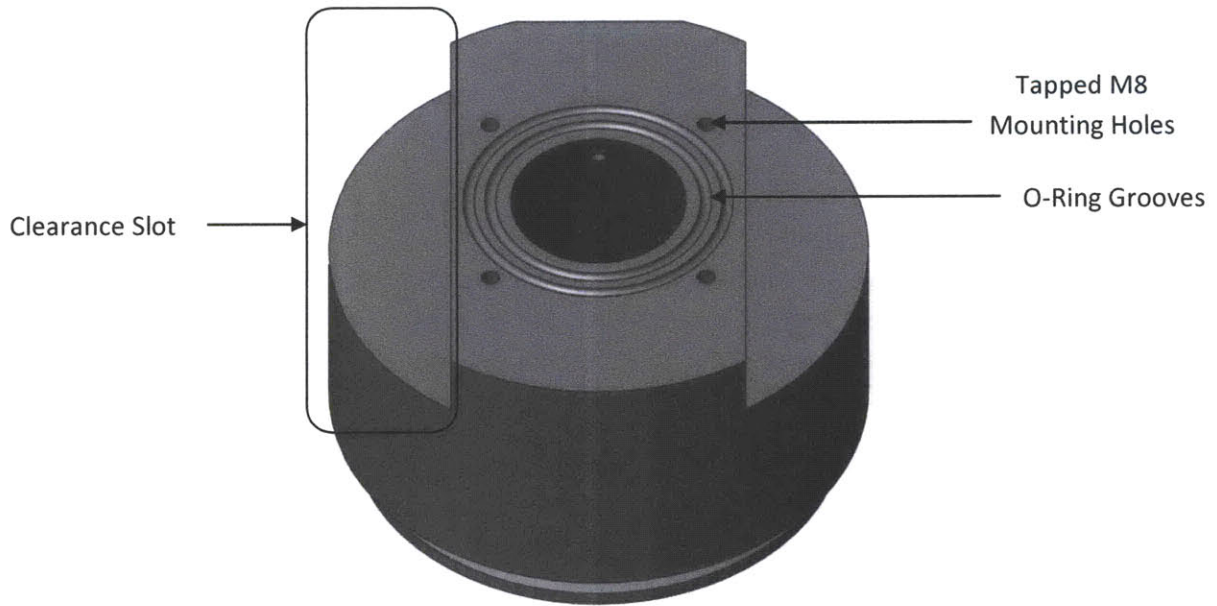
Designed Upper Funnel, Angled Bottom View
